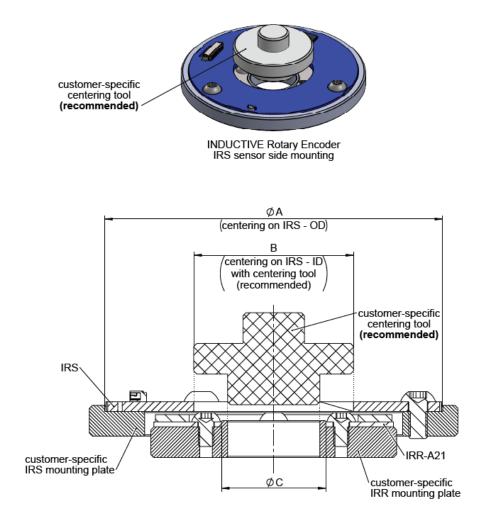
INDUCTIVE Rotary	Encoder IRS s	sensor-side mounting a	and centering
